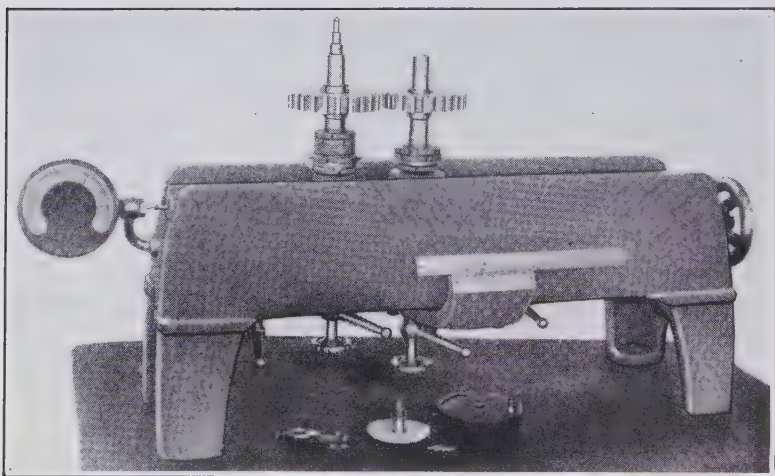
Machine for testing eccentricity of a pair of gears.
